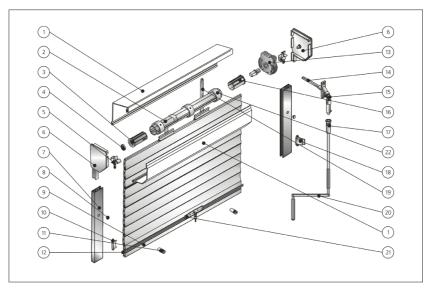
Roller shutter with the reduction (crank) drive and the removable crank rod.
